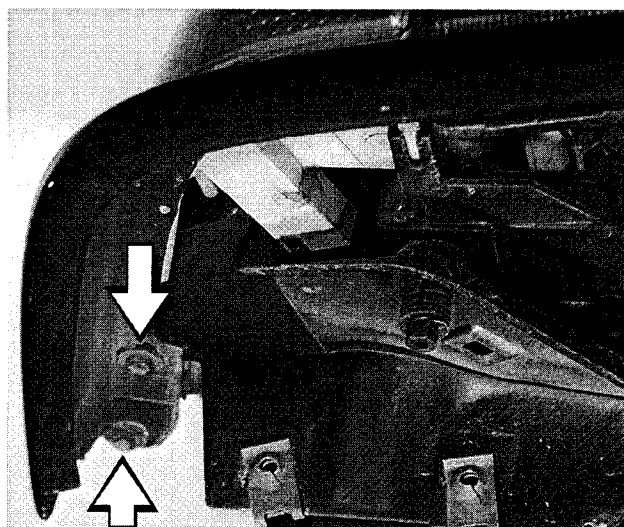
Front bumper must be off to access far right and left front panel retaining screws from below (arrows). (Right side shown.)
